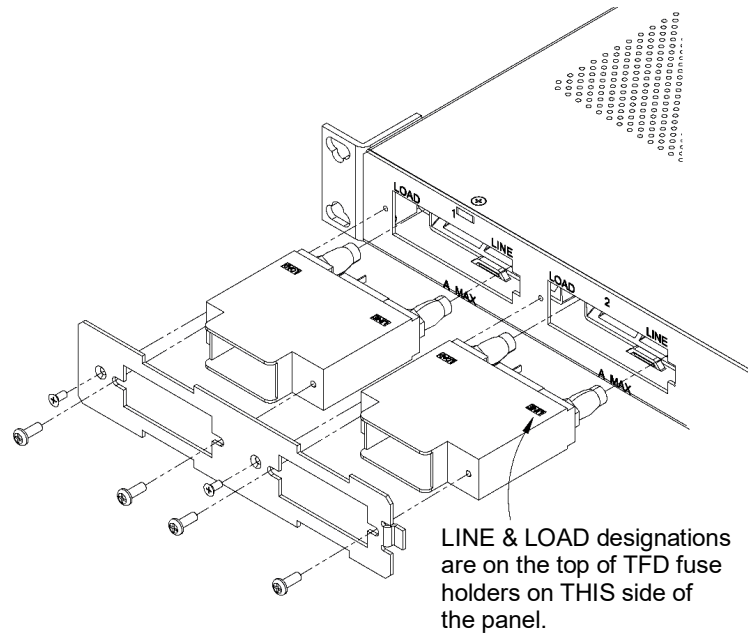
Installing circuit breakers and TFD fuse holders on model 009-7001-0104B
